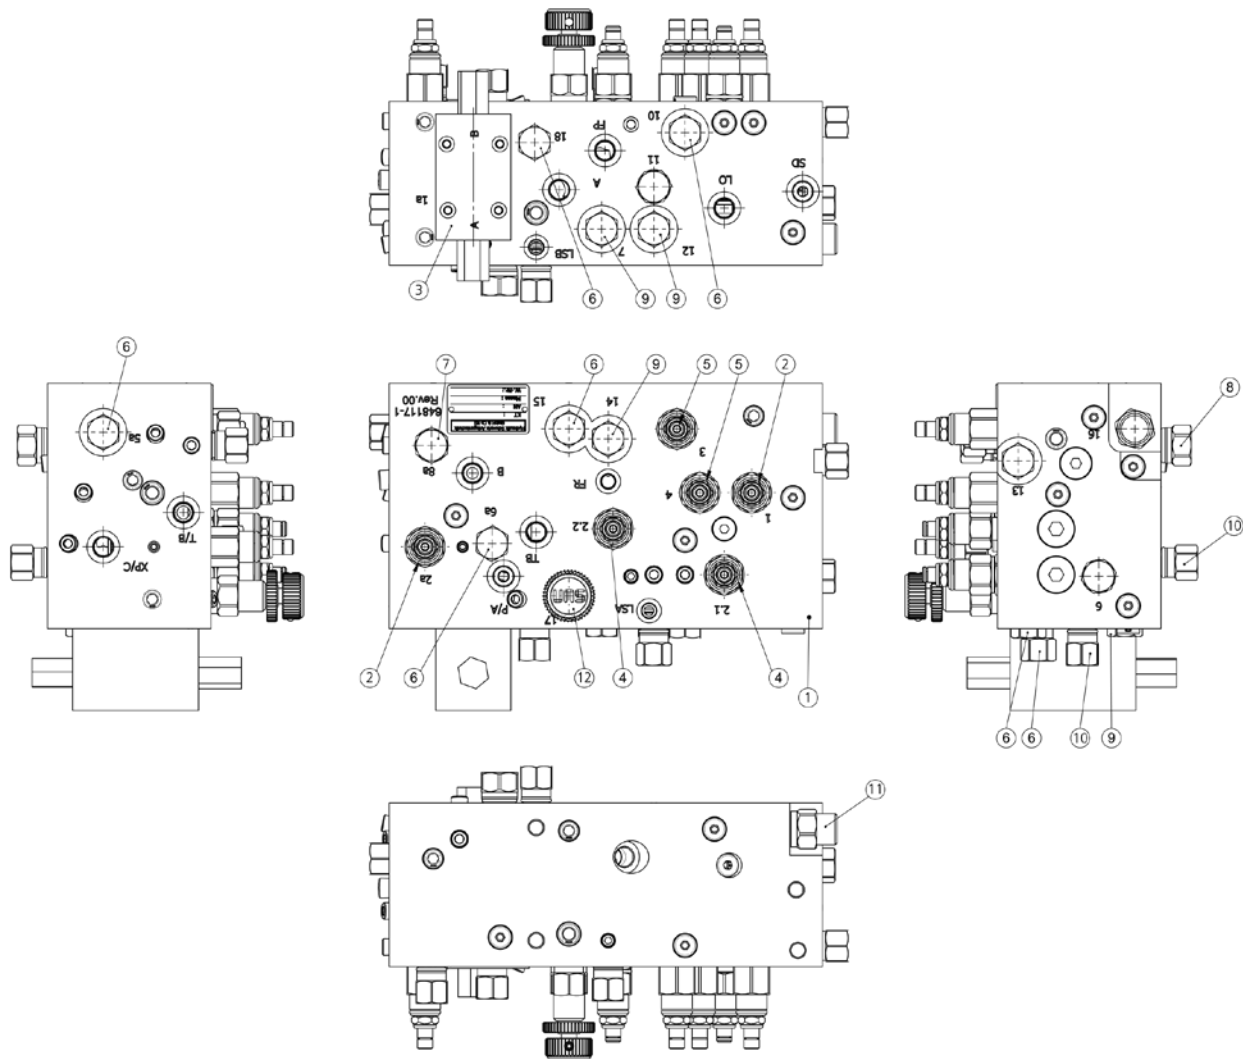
648117-1 Hydraulic Manifold Assembly
